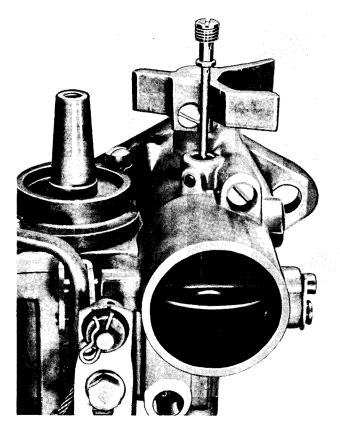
Removing and Installing Idle Restriction Tube MAIN DISCHARGE NOZZLE
